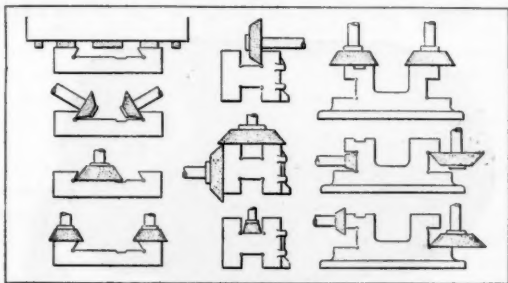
Typical Examples of Work Done on Way and Slide Grinder
